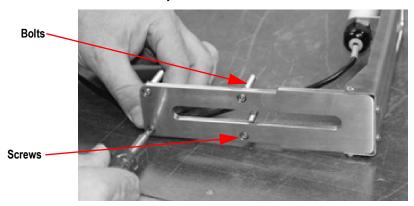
Loosen Four Screws on Bottom of Antenna Assembly
